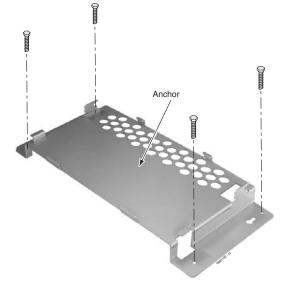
SECURE THE MOUNTING BRACKET WITH THE SCREWS
